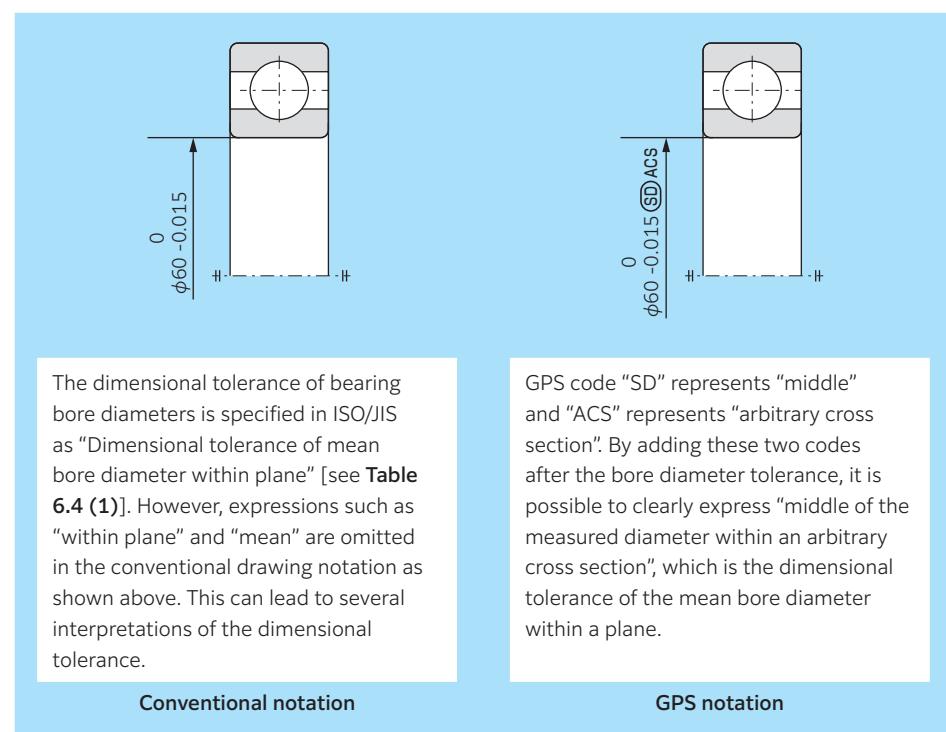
Notation example of bearing bore diameter tolerance
